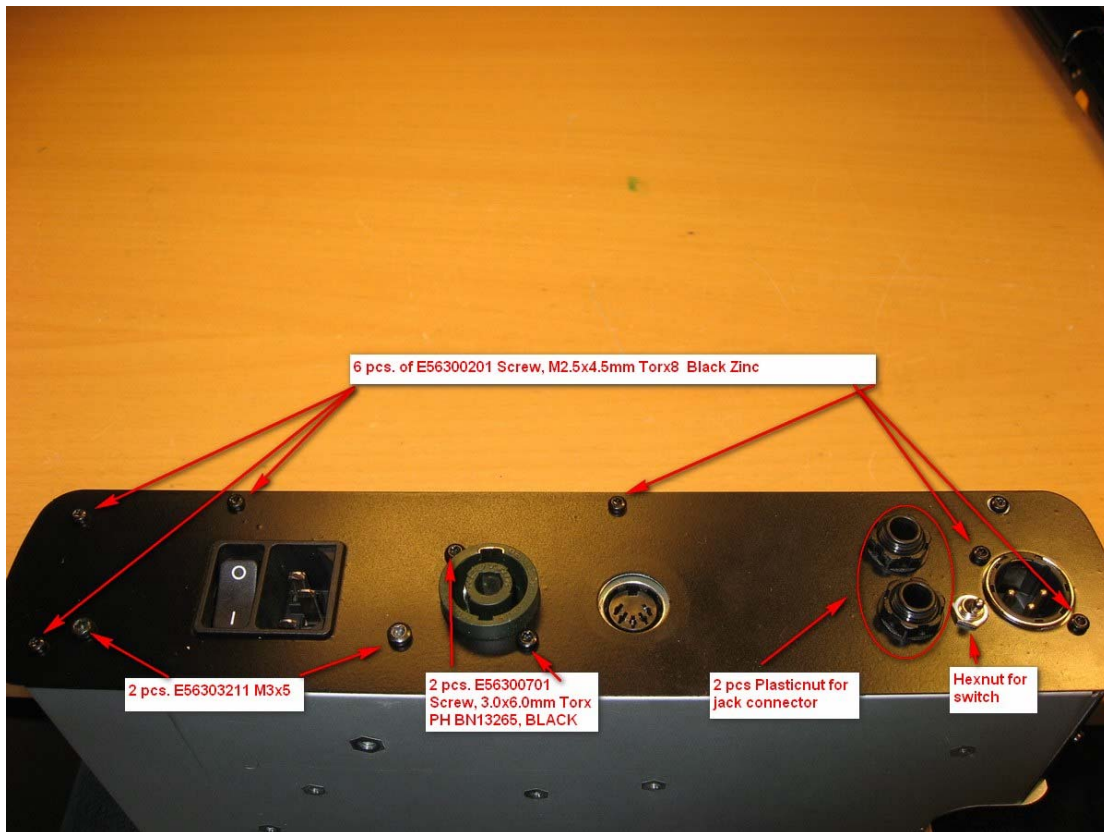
Mount the back plate using the screws/nuts shown in the picture.
